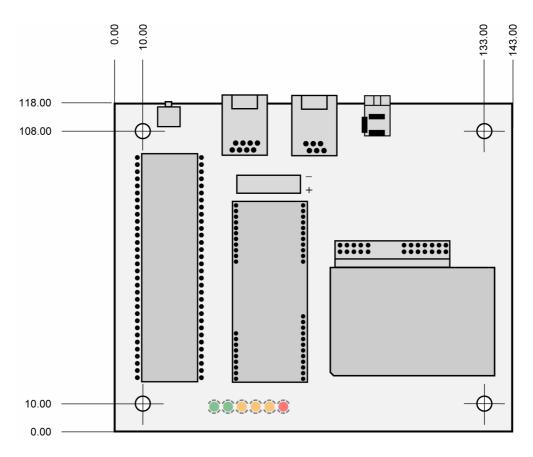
Mechanical dimensions of MB/920-E2M Base Board
